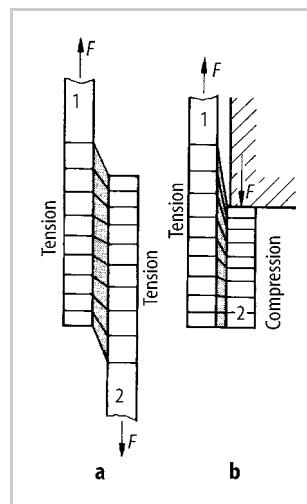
Overlapping adhesive or solder joint with strongly exaggerated deformation from [7.181]: a Parts 1 and 2 deformed in the same sense; b Parts 1 and 2 deformed in the opposite sense
